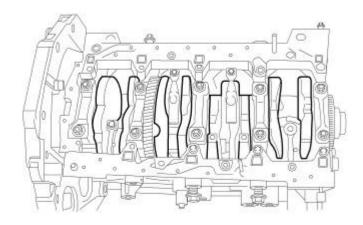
Crankshaft Courtesy of CHRYSLER LLC
